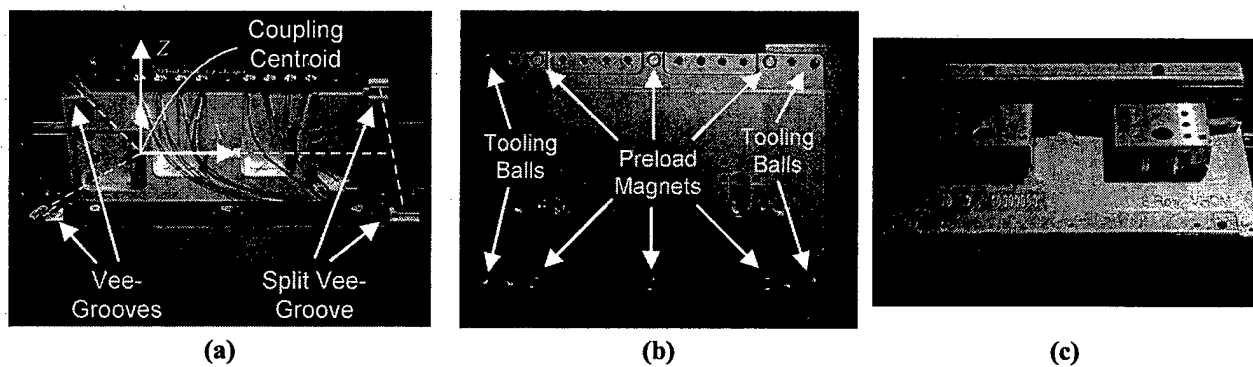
Split-groove Kinematically Coupled Pallet and Assembly Workstation (a) Machine base with vee-grooves and preload magnets, (b) Bottom of fixture plate with tooling balls and preload magnets, (c) Pallet and fixture plate kinematically coupled to machine
